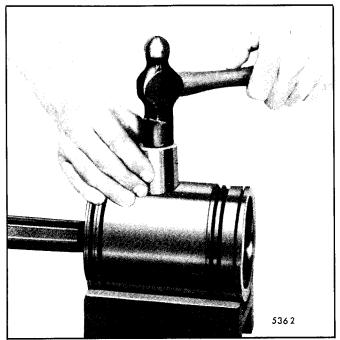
Installing Piston Pin Retainer using Tool J 23762-A
